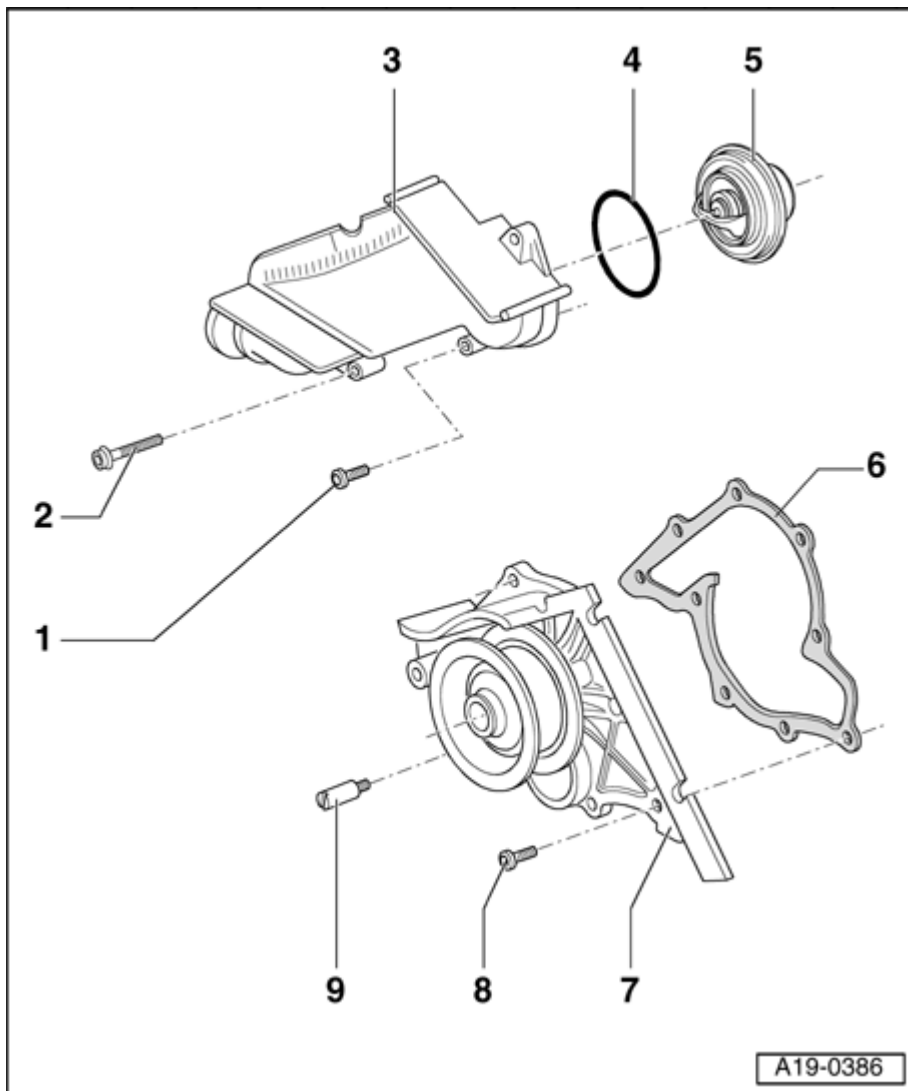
Coolant Pump And Coolant Thermostat, Assembly Overview
